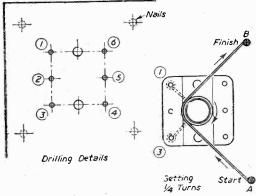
(left).—The board is drilled as shown and sidewire identification numbers written on the board.
